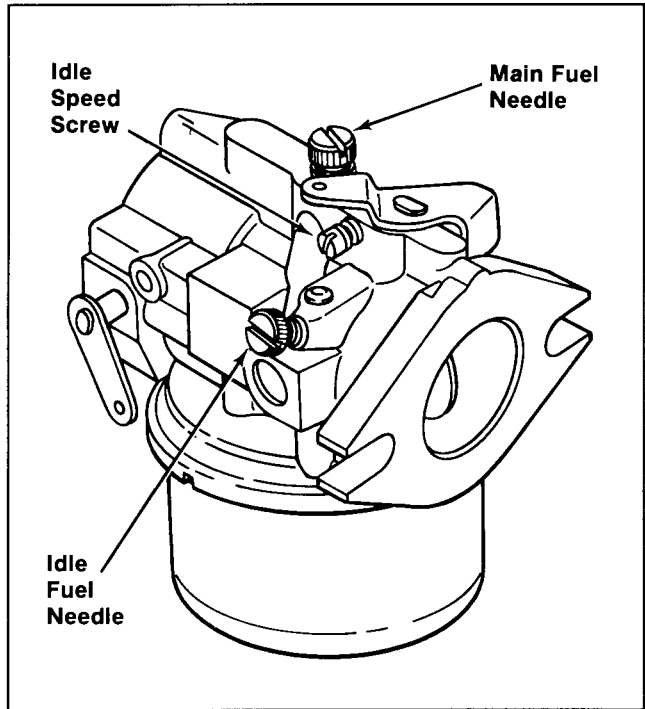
Kohler-Built Adjustable Jet Carburetor.
